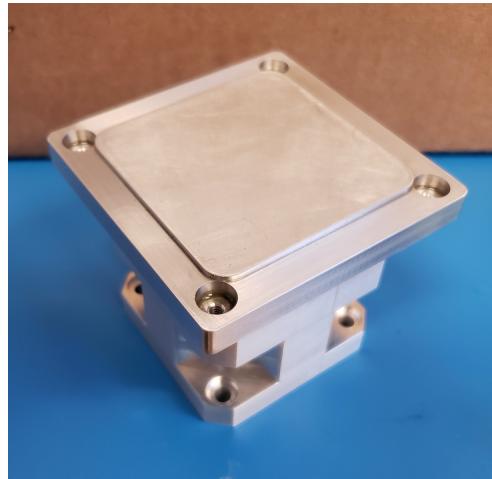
Picture of the Isometric Top view of J.K Coldfinger.
